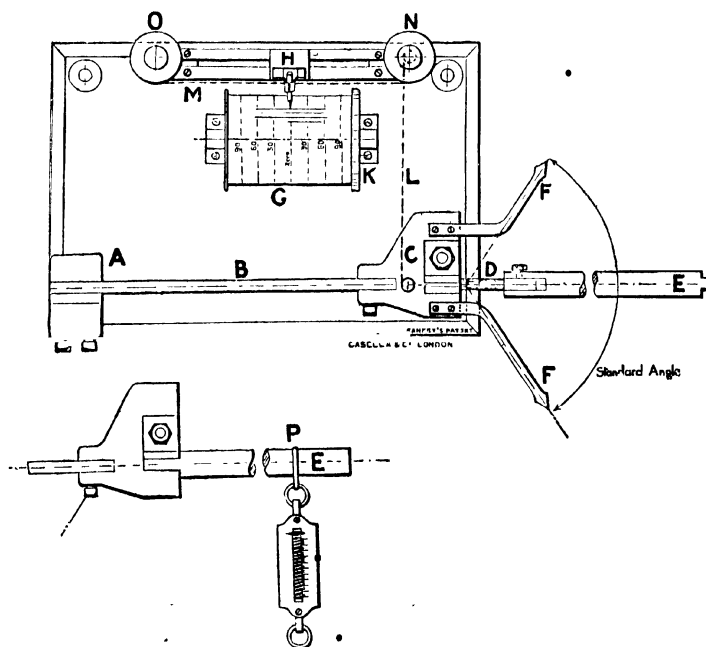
THE SANKEY HAND-BEND TESTING MACHINE.
